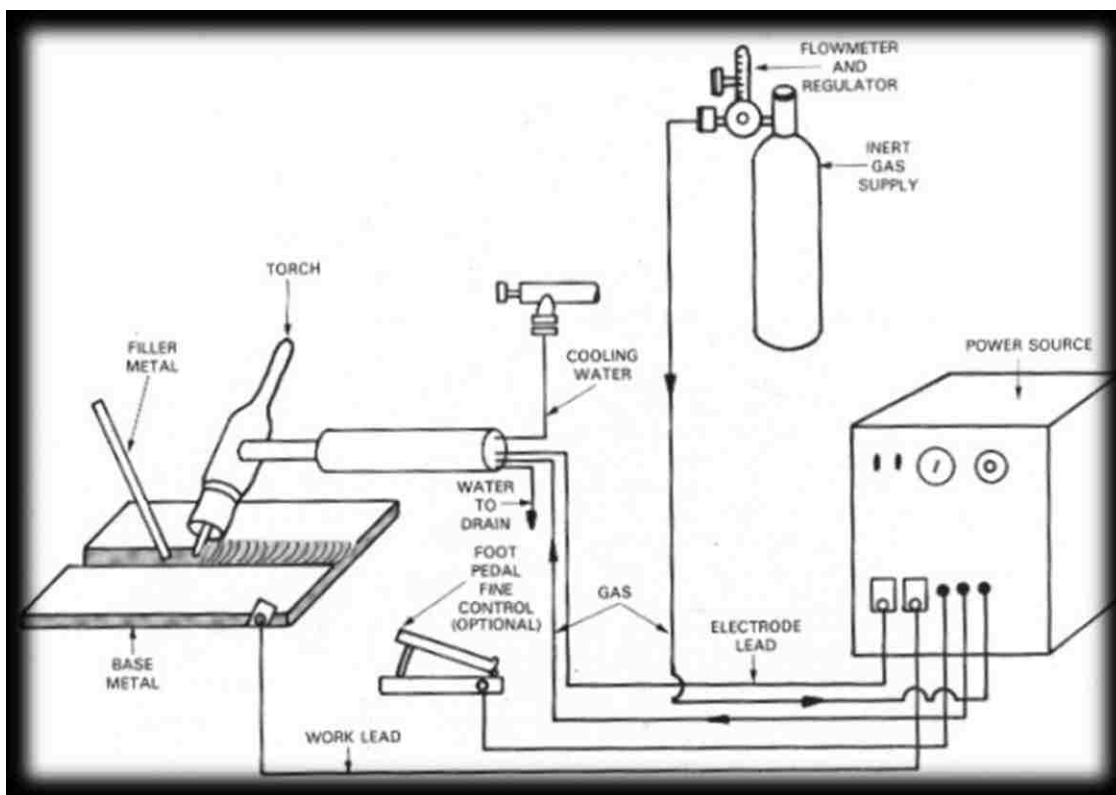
Schematic of the TIG welding process [20].
